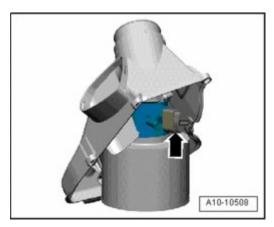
Identifying Electrical Connector On Mass Air Flow Sensor
